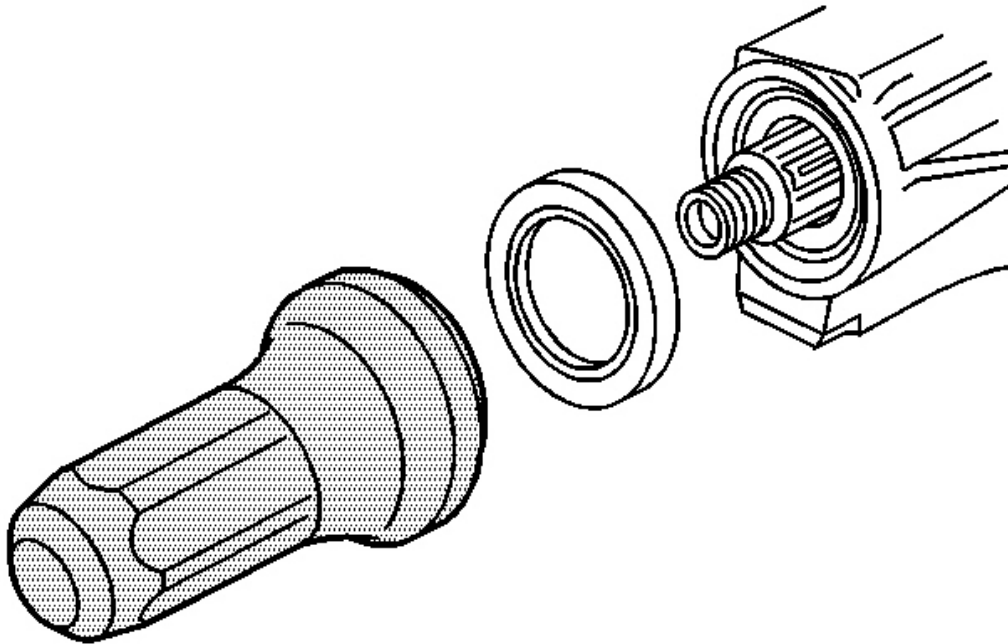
Installing New Pinion Oil Seal Using J 22388
